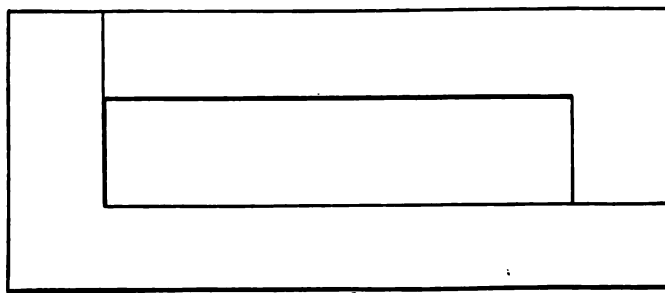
Method of Mounting Punchings Shown in Fig. 26
